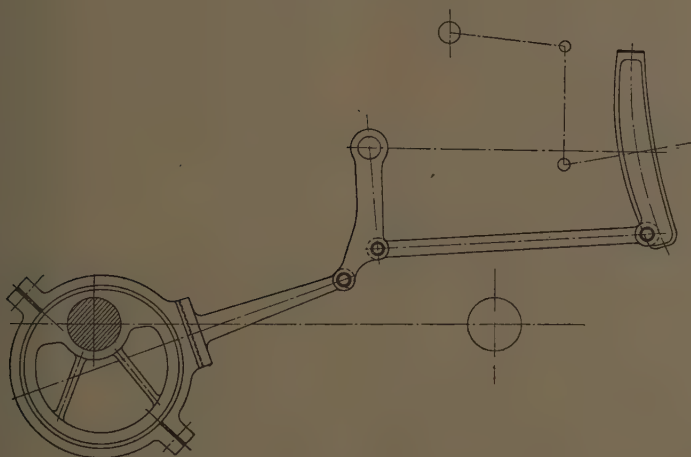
Eccentric drive, with intermediate lever for inner valve motion of series 44 locomotives.
